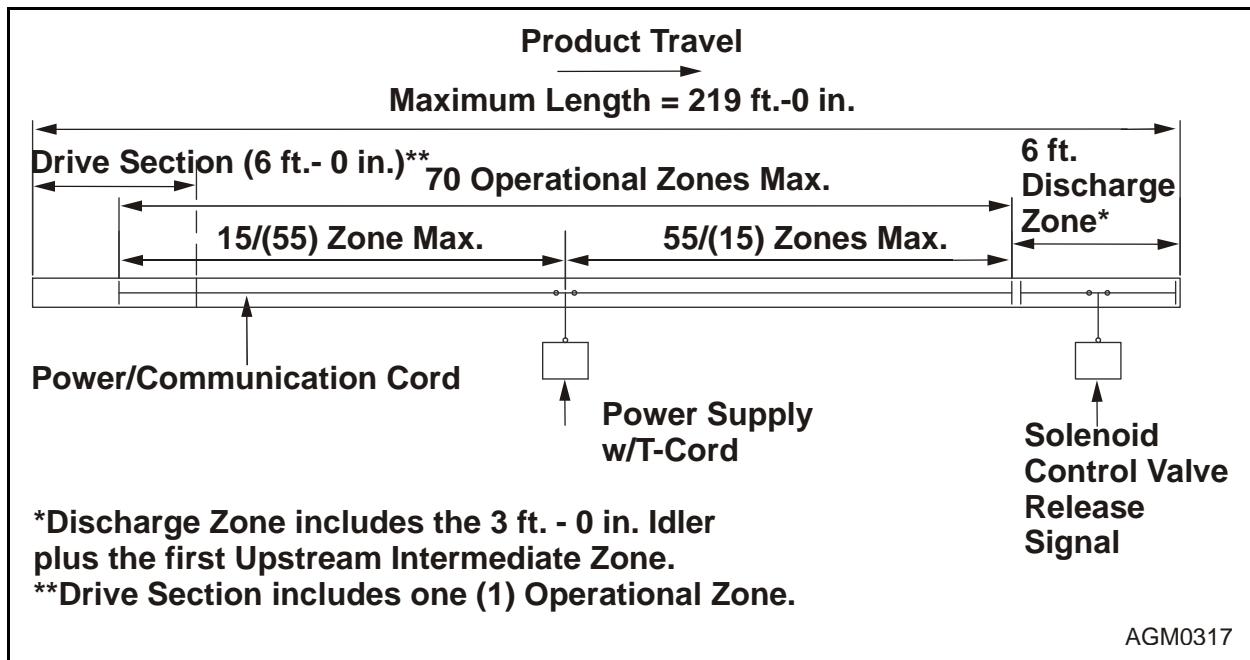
18 Full-Length Slug-Release - Single Power Supply
